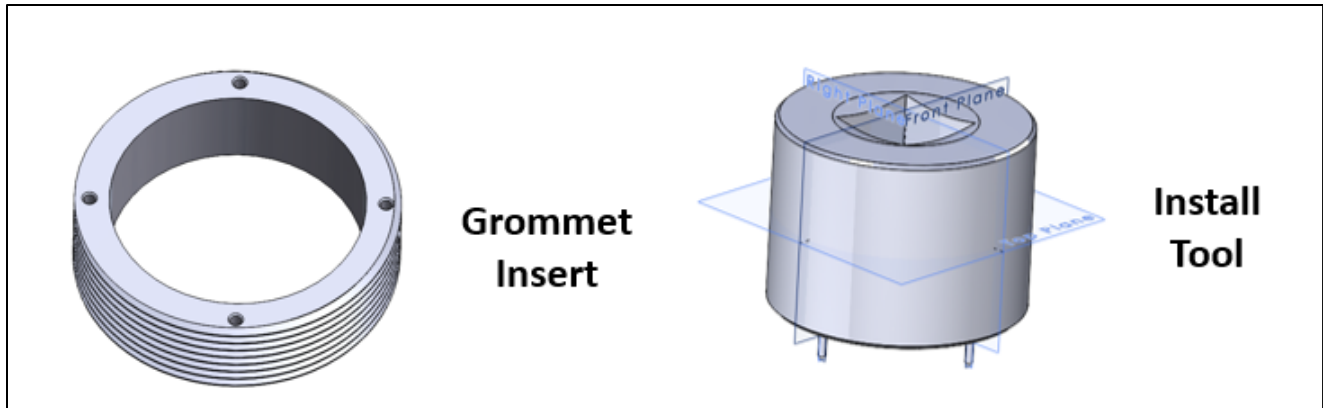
Drawings of an example threaded grommet insert and installation tool that will enable different dilution hole sizes to be installed and studied within the combustor profile simulator.
